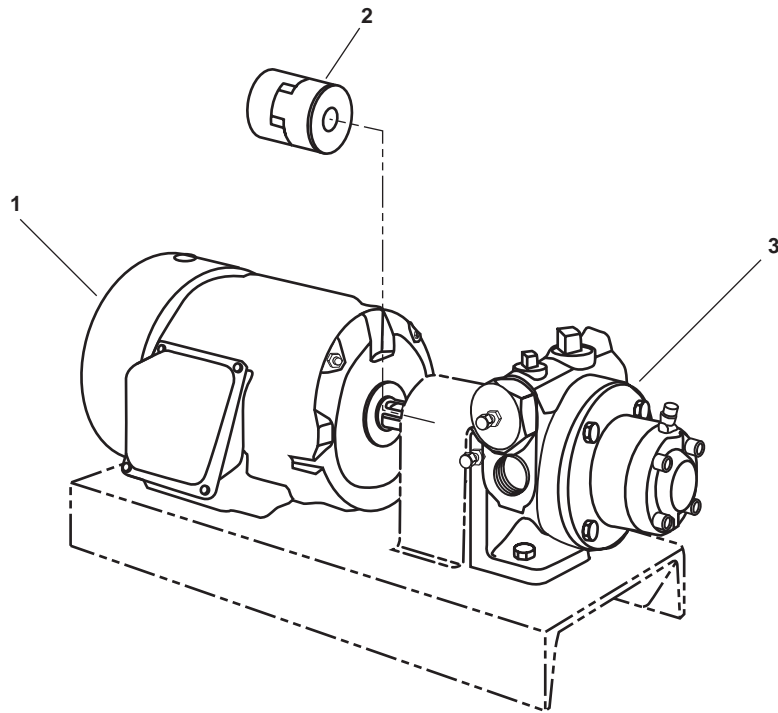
Prelubrication Oil Pump (Sheet 1 of 2)
